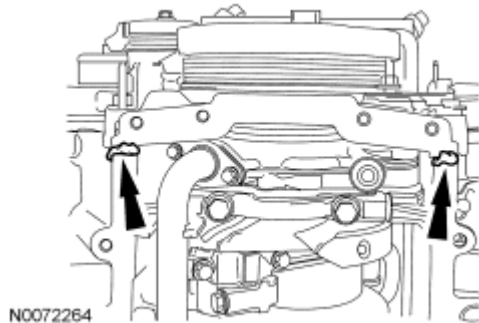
Applying Silicone Gasket & Sealant At Engine Front Cover-To-Cylinder Block Sealing Surface
